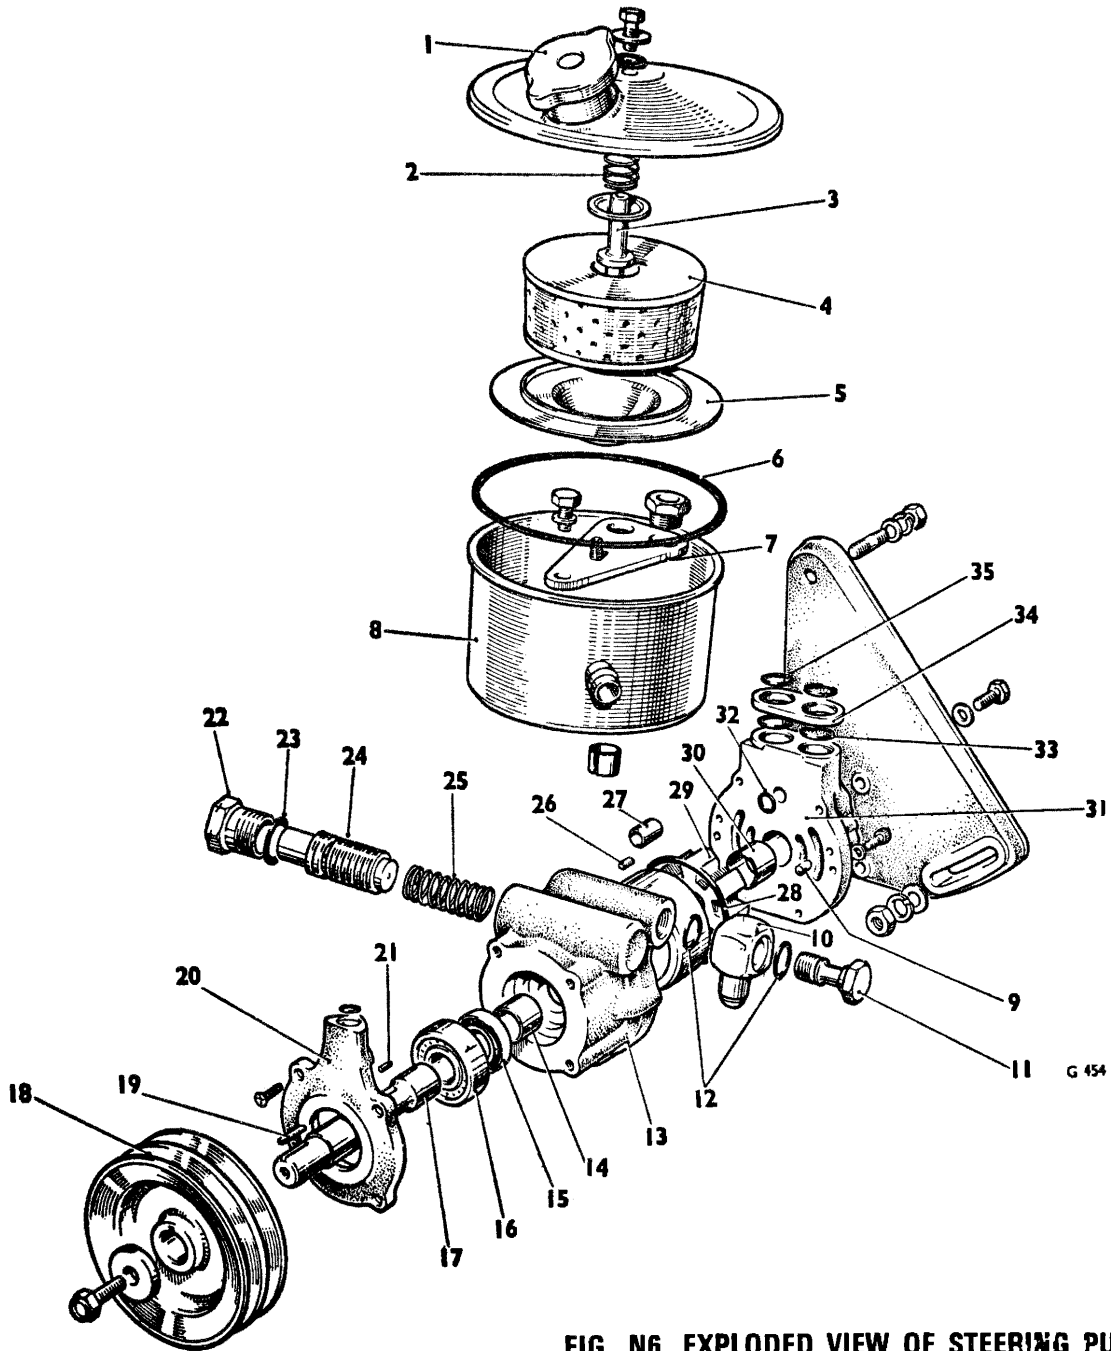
EXPLODED VIEW OF STEERING PUMP
